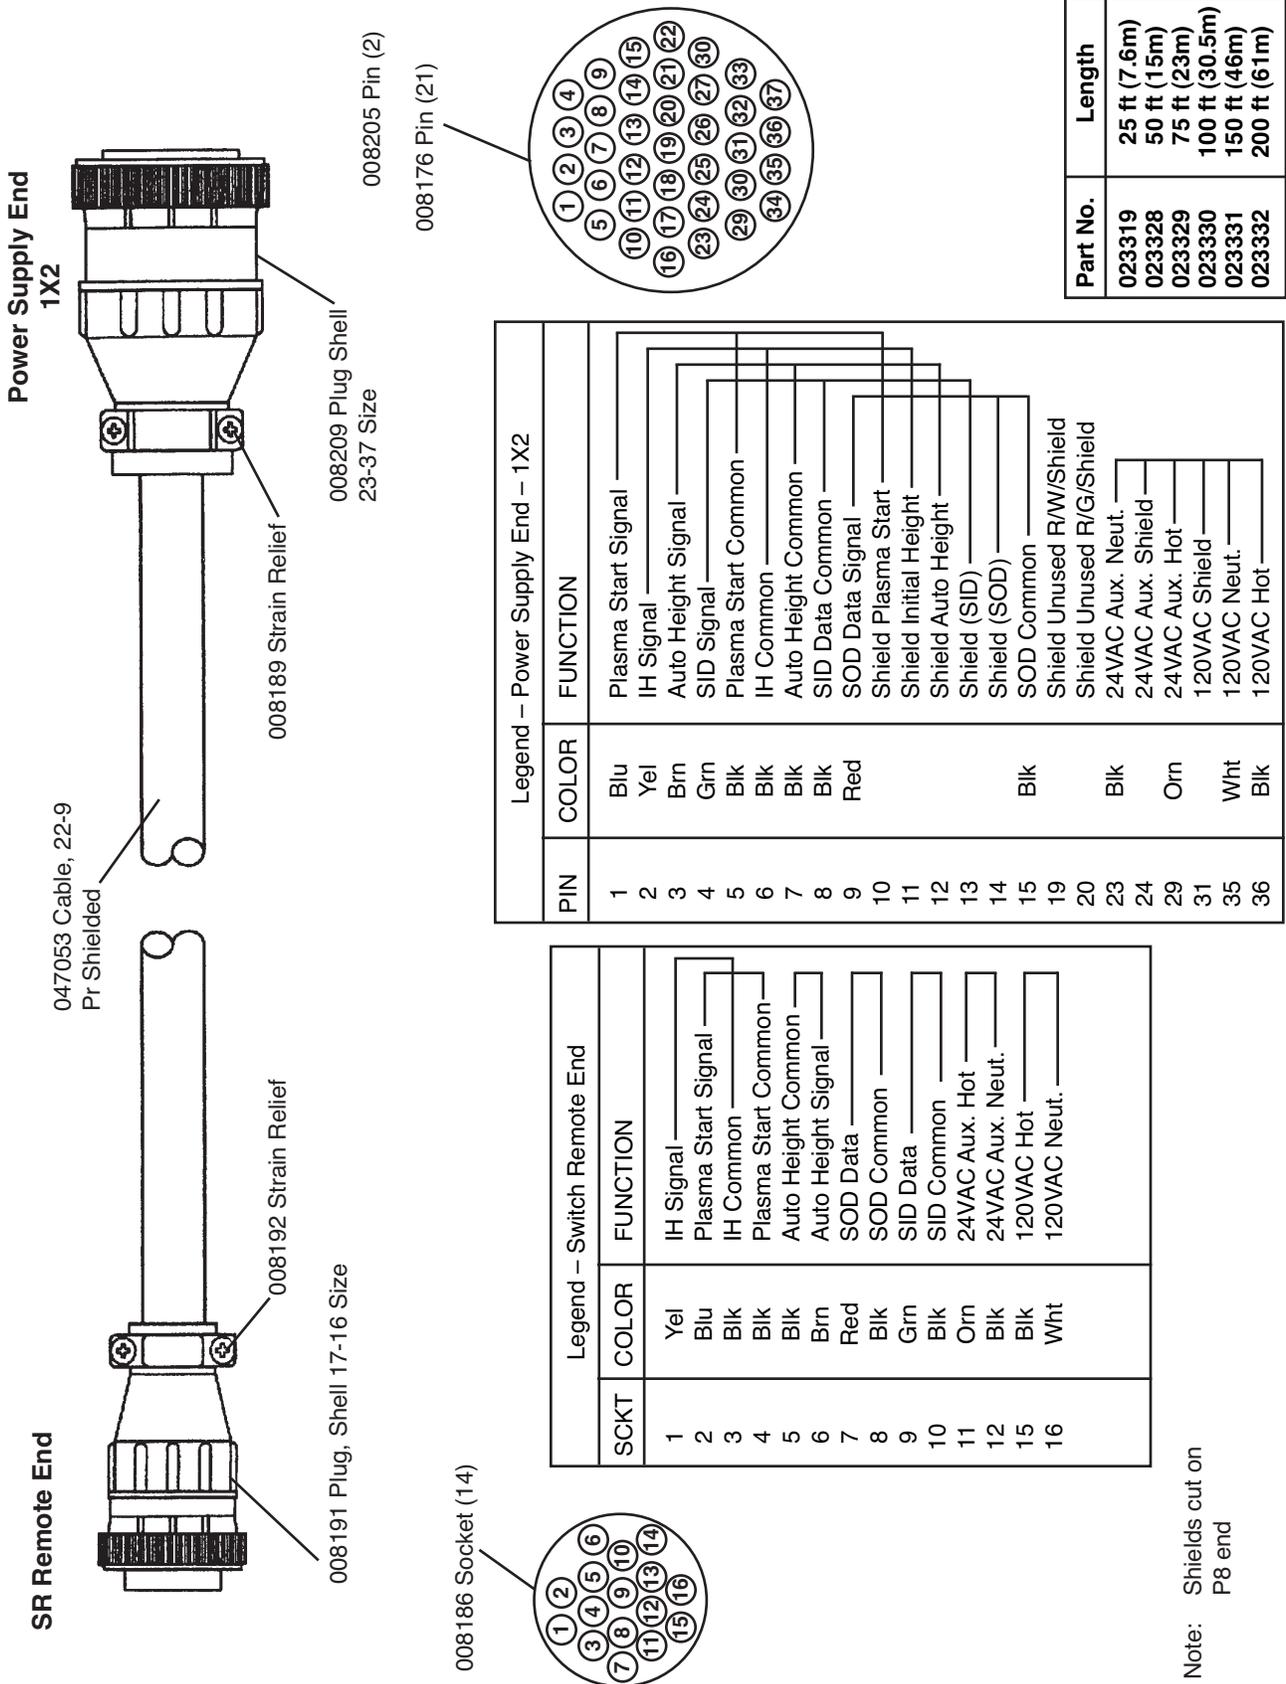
Remote V/C Cable - Power Supply to Switch Remote (SR) V/C
